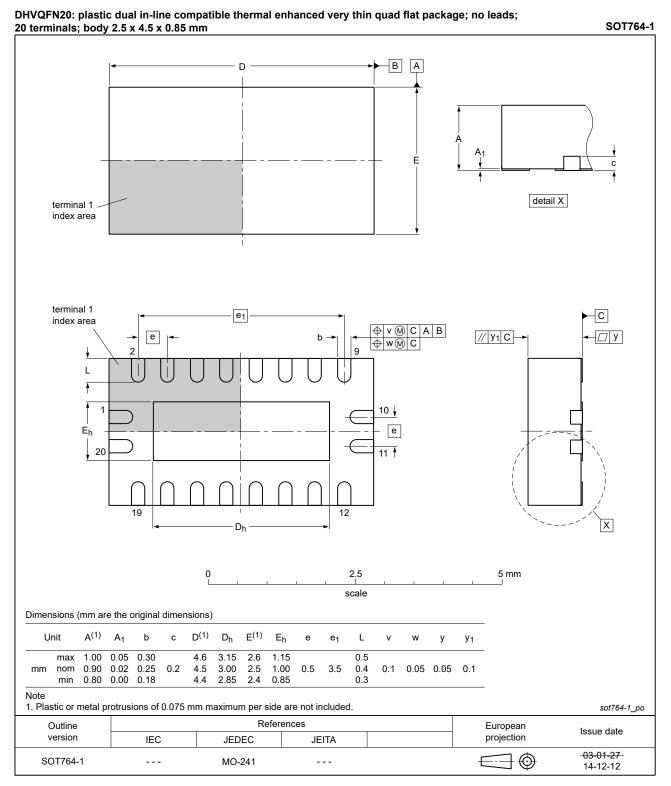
Package outline SOT764-1 (DHVQFN20)
